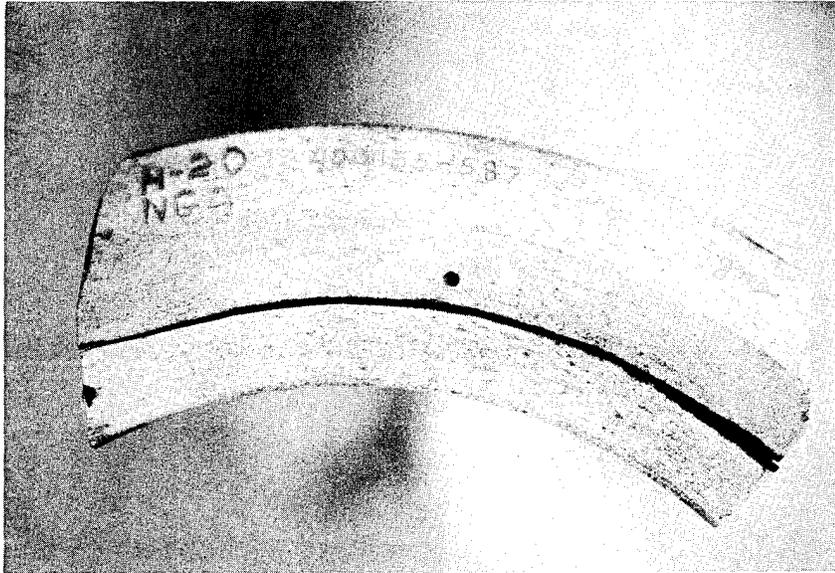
Dye Penetrant Inspection of Dovetail
